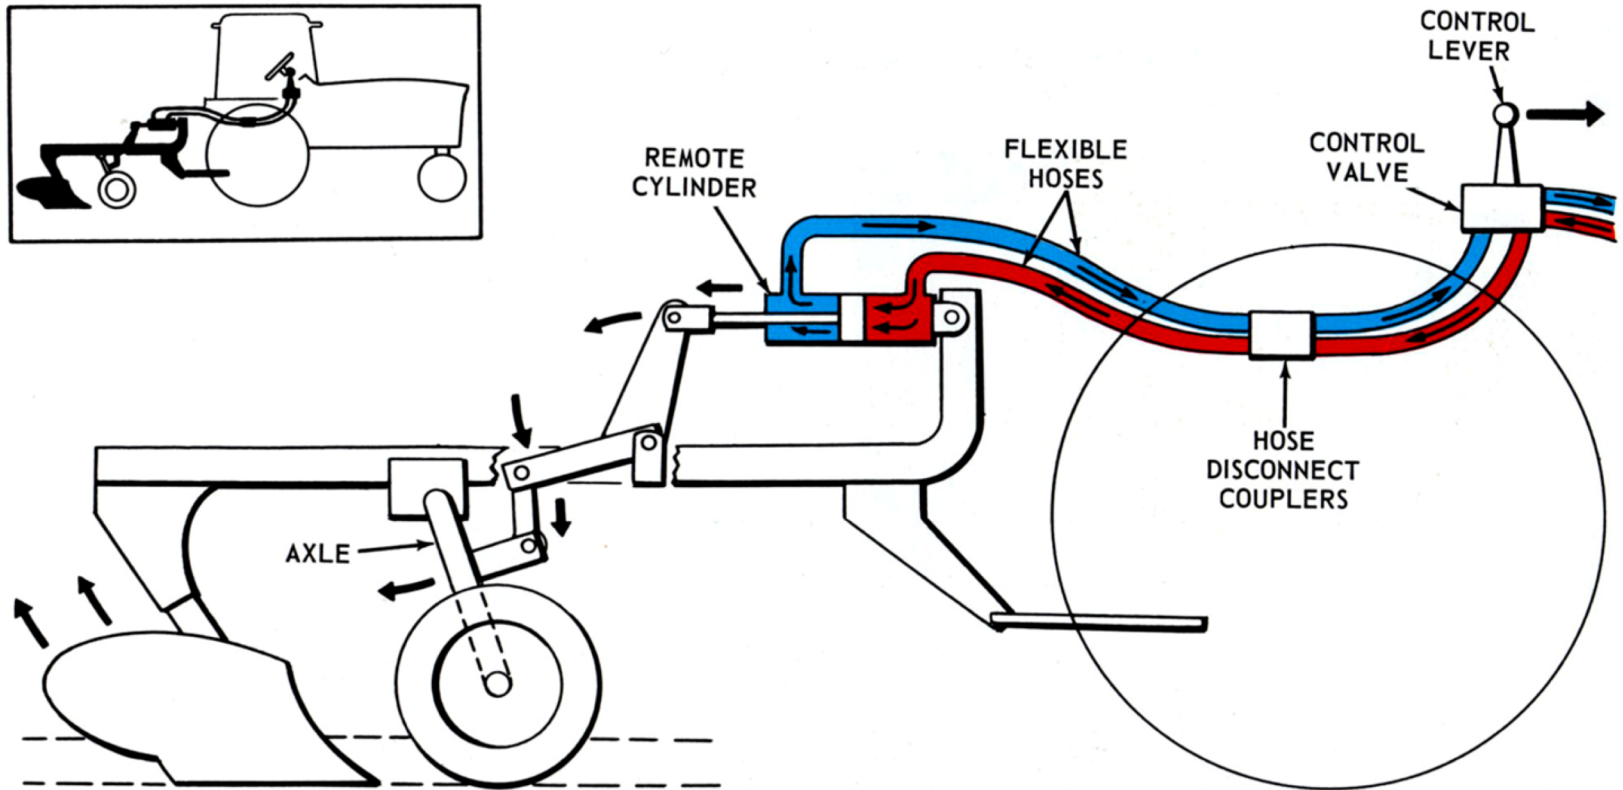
Raising A Pull-Type Plow Using Remote Cylinder Hydraulics
